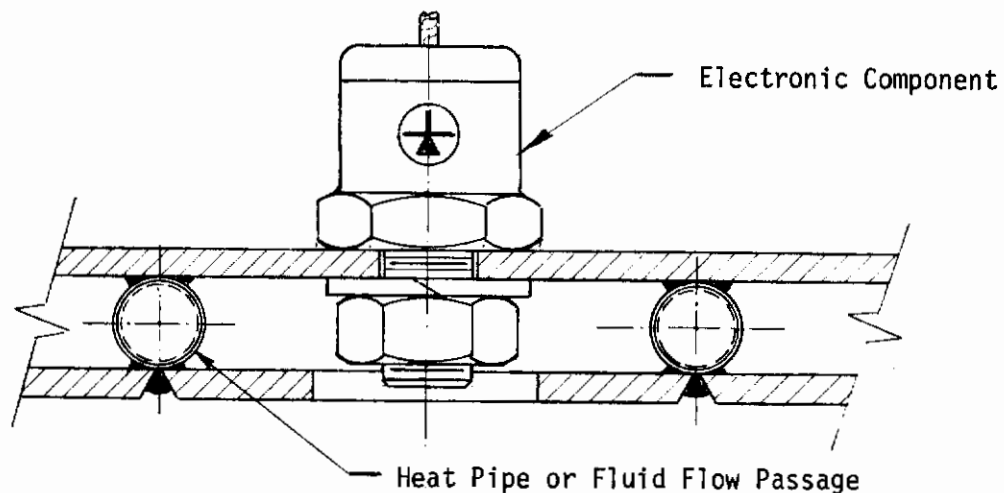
ELECTRONIC COMPONENT MOUNTING ON A COLD PLATE
